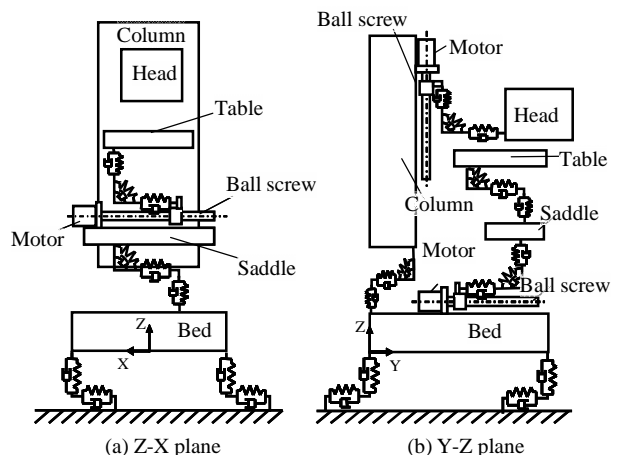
Dynamics model of machine tool structure and feed drive mechanism
